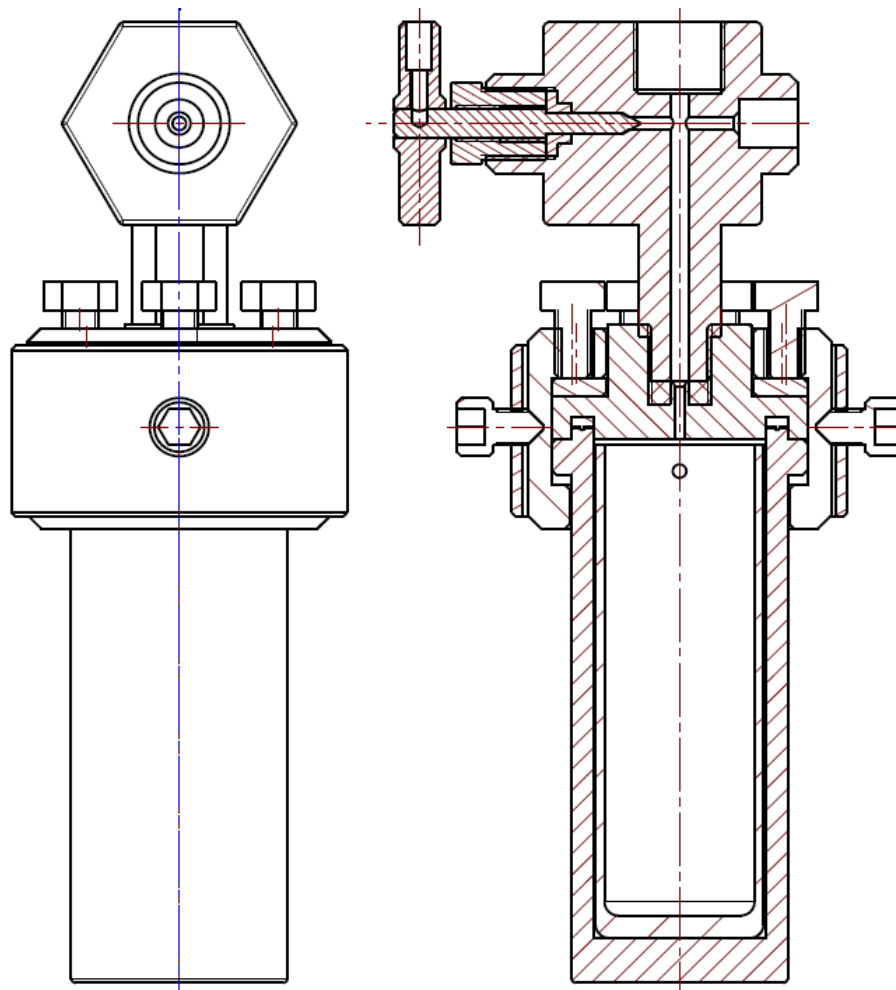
Detailed engineering section view of the first test set-up prototype
